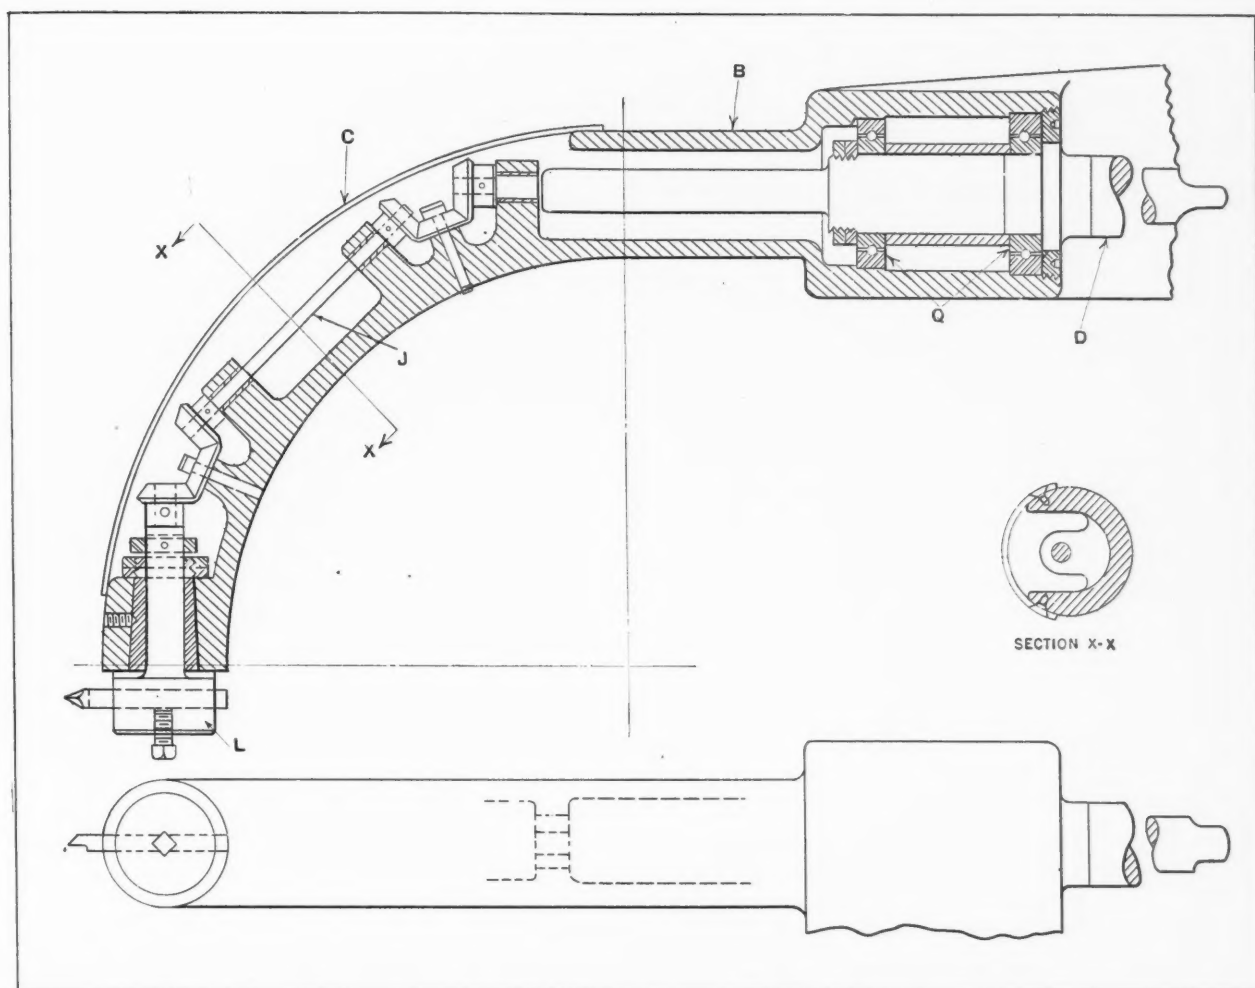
Sectional View of Boring-bar Used in Set-up Shown in Fig. 1
